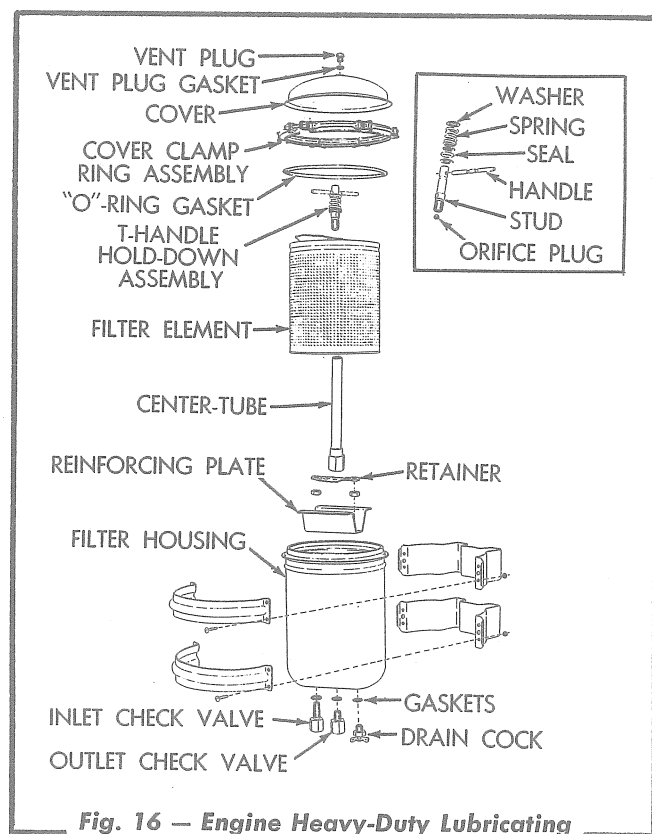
Engine Heavy-Duty Lubricating Oil Filter Details
